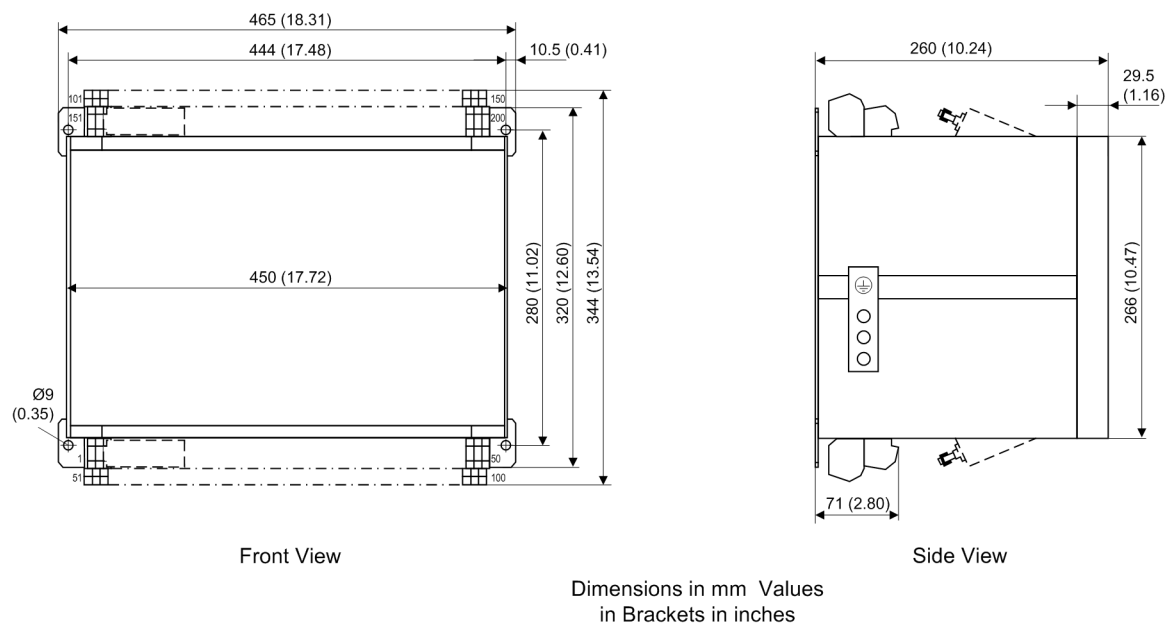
Dimensions of a device for panel surface mounting (size $1/1$)
